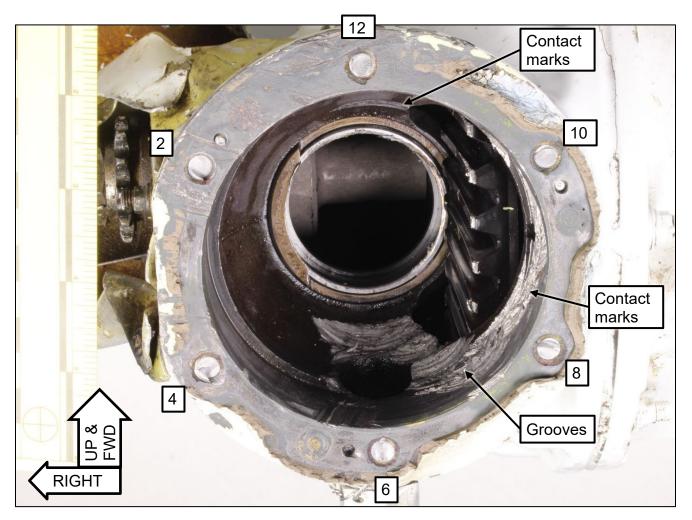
Mounting surface of the 90° gearbox assembly after cleaning. Fractured attachment studs are numbered by clock position as shown in figure 2.
